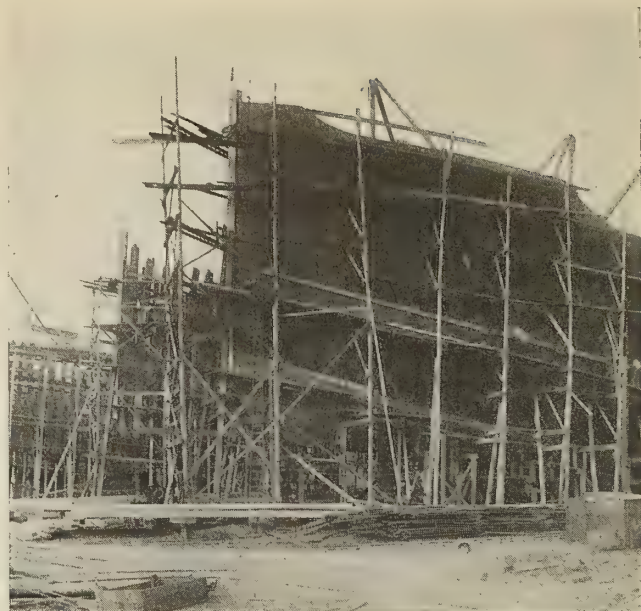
Daugherty Type Wooden Steamer Under Construction at Orange, Texas, Showing Diagonal Planking
